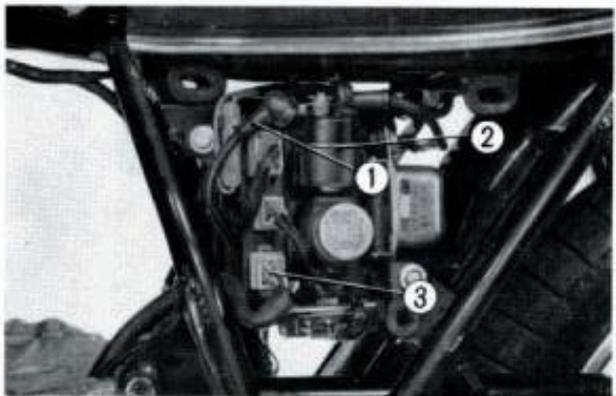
① Starting motor cable ② Magnetic switch ③ Wiring coupler
